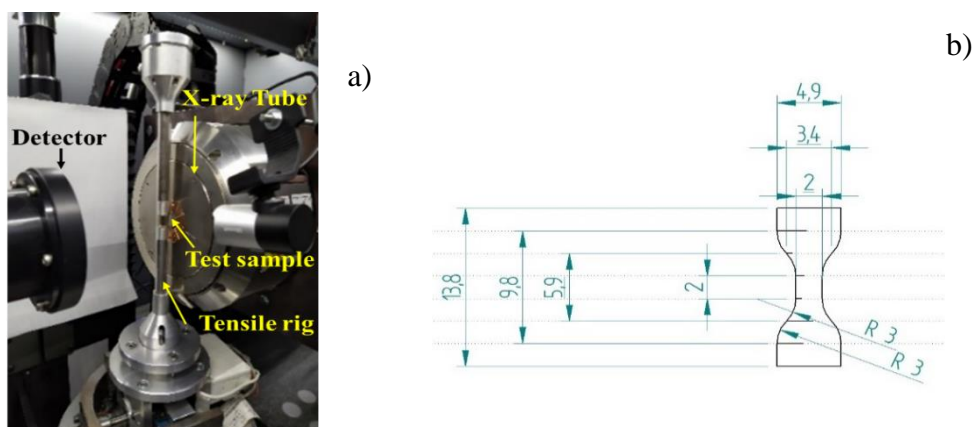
Tensile rig kept installed inside an X-ray Tomography machine, b) sample geometry used for fatigue tests
